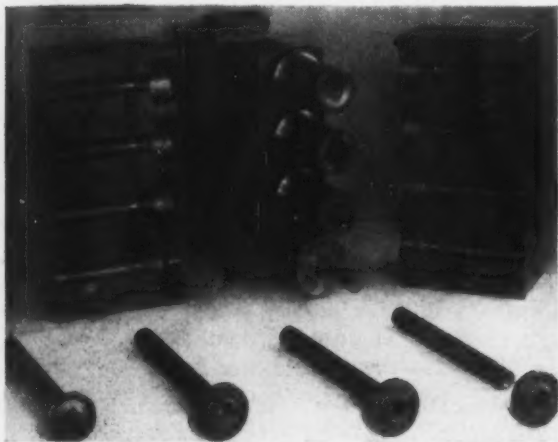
Small clutch hubs are produced with these forging dies and tools. Courtesy, Ajax Mfg. Co.
